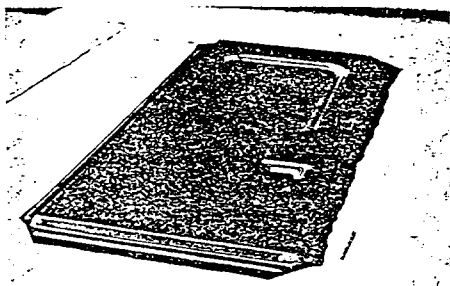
A door panel obtained by hydraulic counter-pressure forming.
